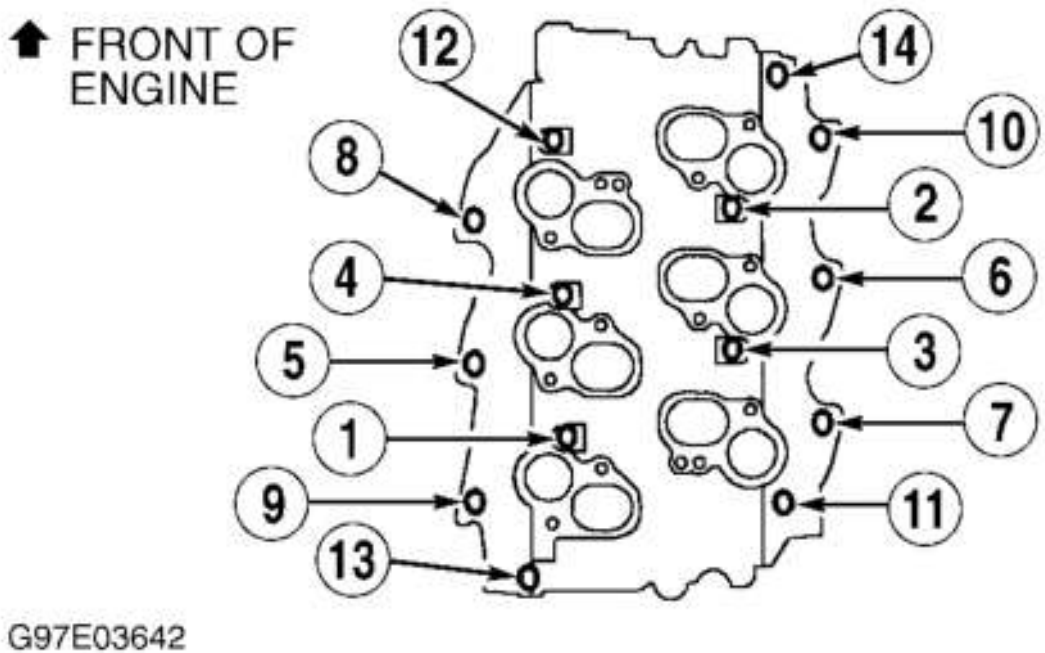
Lower Intake Manifold Bolt Tightening Sequence
